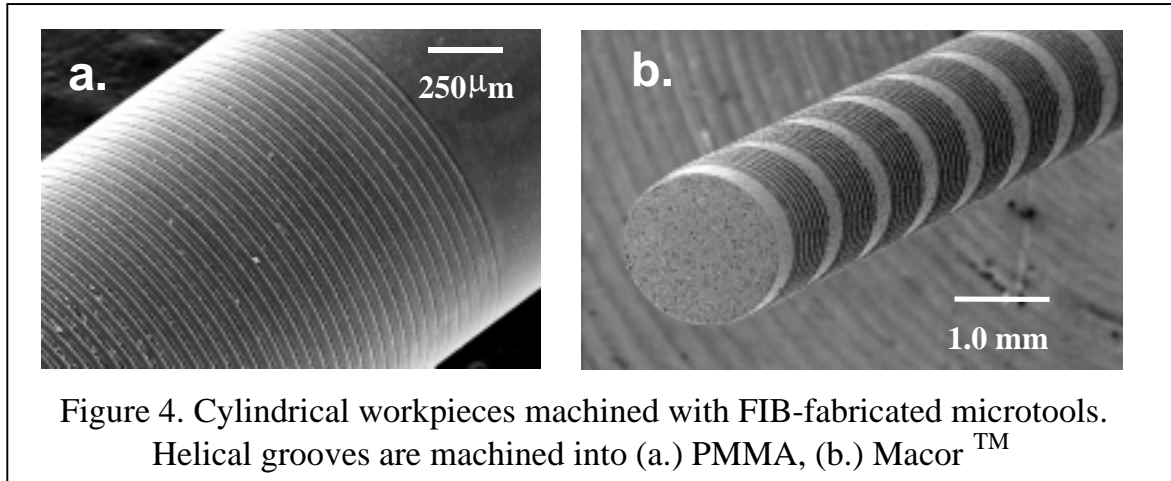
Cylindrical workpieces machined with FIB-fabricated microtools. Helical grooves are machined into (a.) PMMA, (b.) MacorTM
